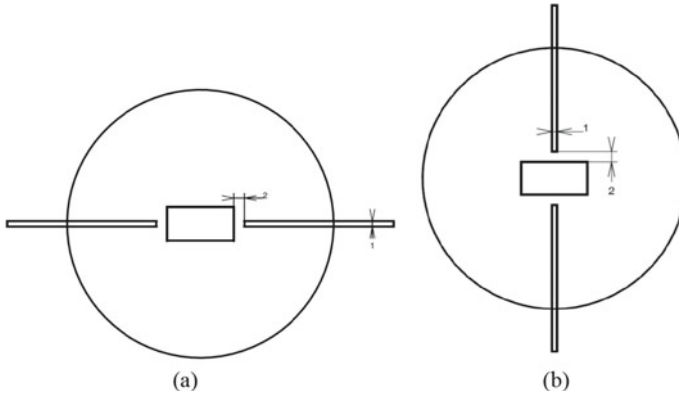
Injection along major axis (a) and minor axis (b), (All dimensions in mm)
